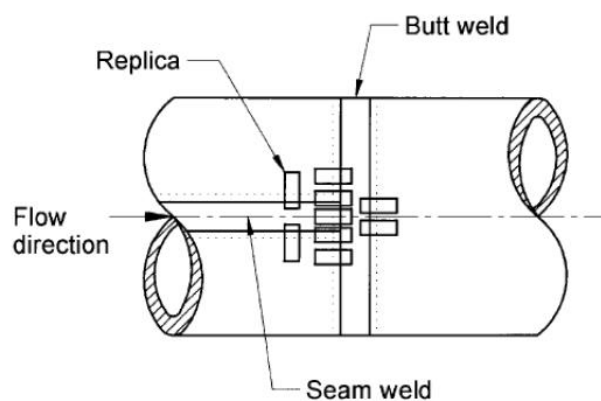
Triple-Point replica positions on seam weld.
